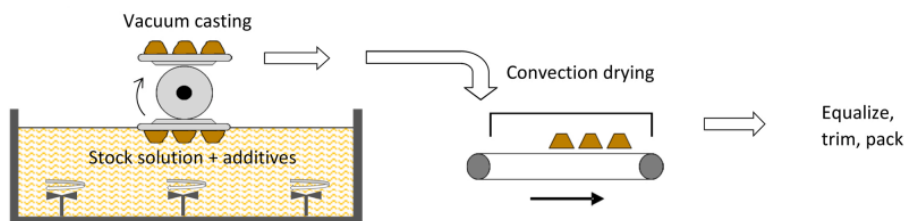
One cast molded paper processing technique (Semple et al., 2022)
